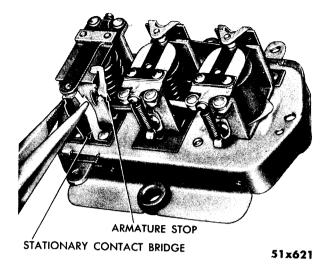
Adjusting Cut-Out Relay Contact Clearance
